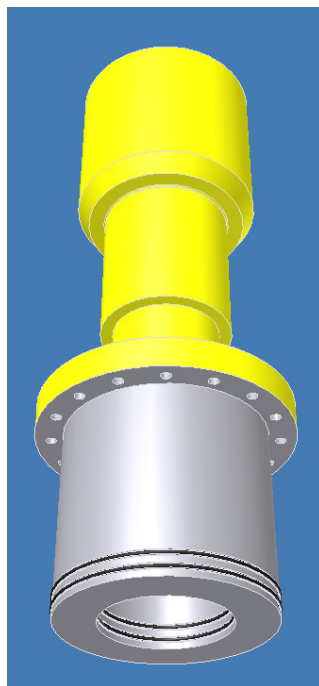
The piston geometry of the top connector. Seals are placed on the inside and outside of the lower part of the piston geometry.
